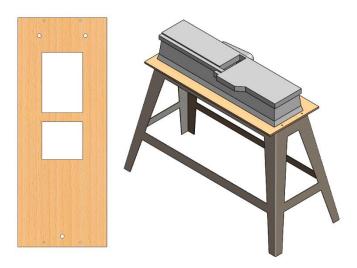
Top view of baseboard (left) and baseboard between jointer and jointer stand (right).
